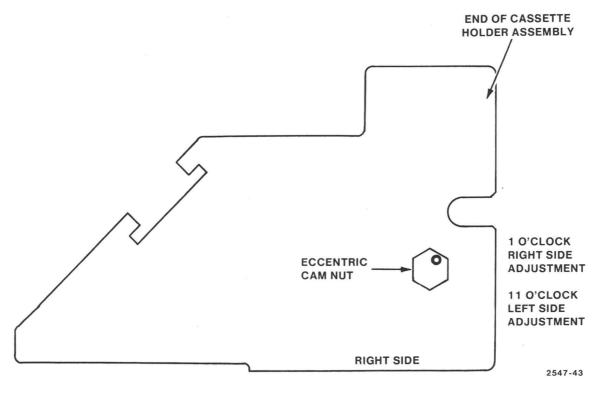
Eccentric Cam Nuts for Adjusting Rollers.
